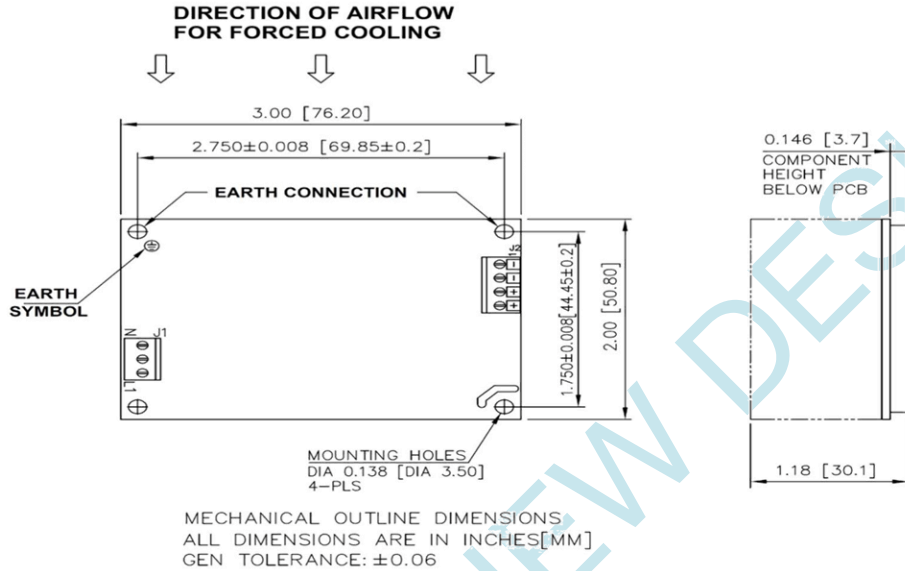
Mechanical Drawing - Screw Terminal (Option 1)
